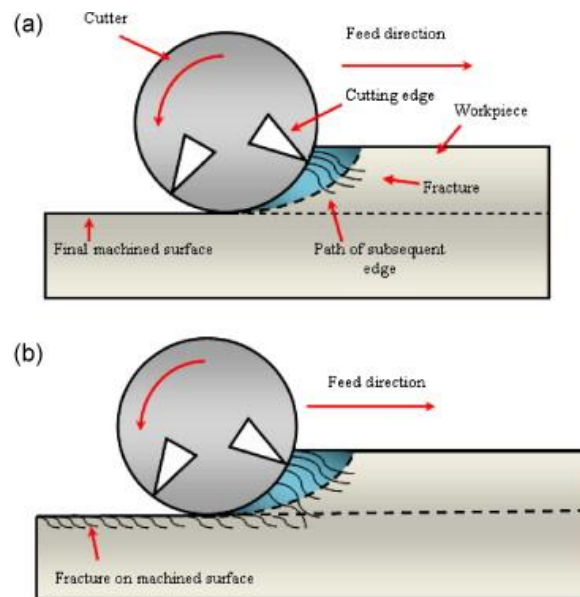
Upmilling process of brittle material with critical chip thickness induced fracture being removed by the subsequent path (a) and reaching the machined surface at high feed per tooth (b) (from [122] with permission of Elsevier Inc., license number 3633721035483).
